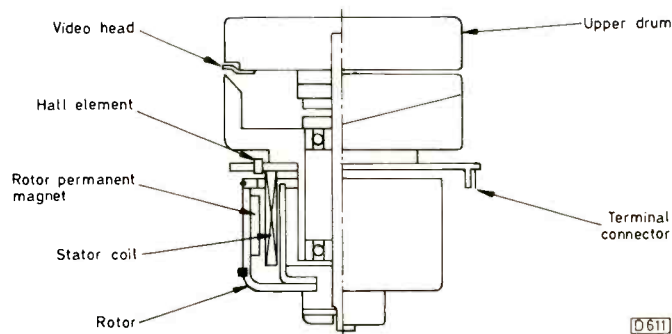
Construction of the HR7200/3V29 drum motor. The drive transistors shown in Fig. 4 are mounted on a separate motor drive amplifier board.
